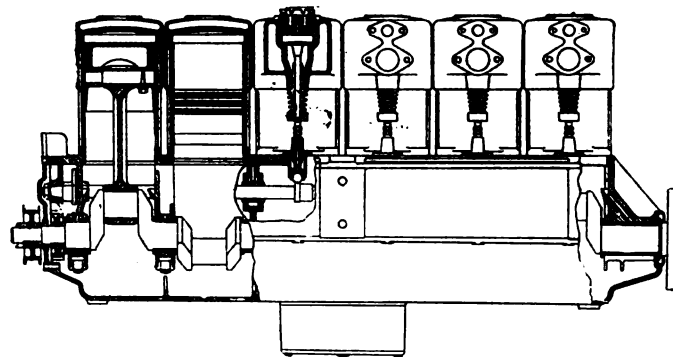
Sectional elevation of the new Standard six-cylinder engine.
